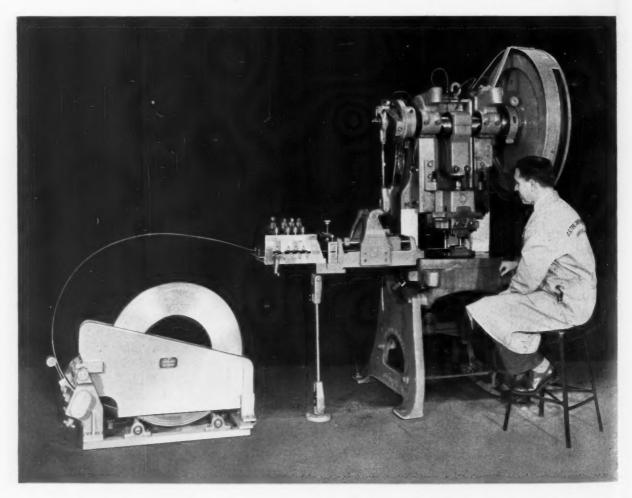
Press with power-driven coil cradle, slide feed, and straightener made by U.S. Tool Co., Inc.
